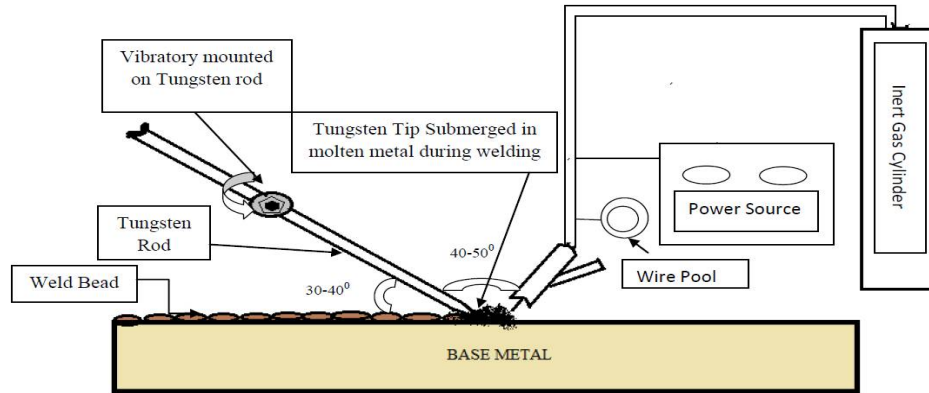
Schematic illustration showing the use of auxiliary vibratory set up used during MIG welding
